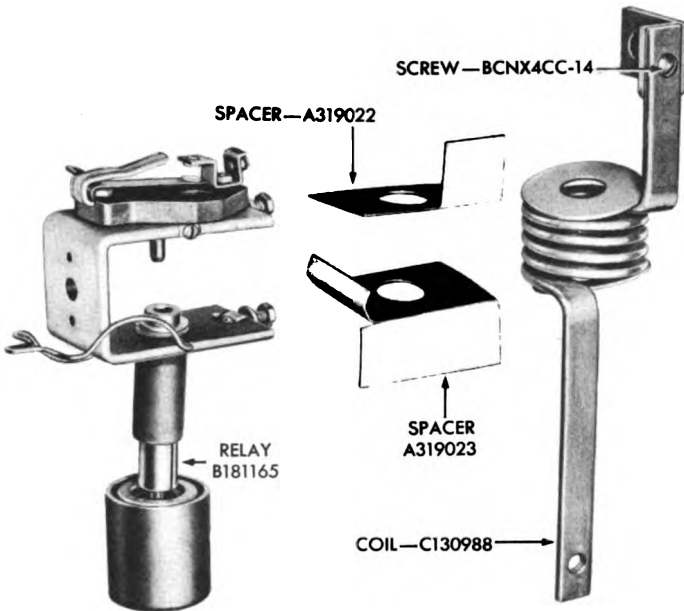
Circuit Breaker Panel Assembly Partially Disassembled
